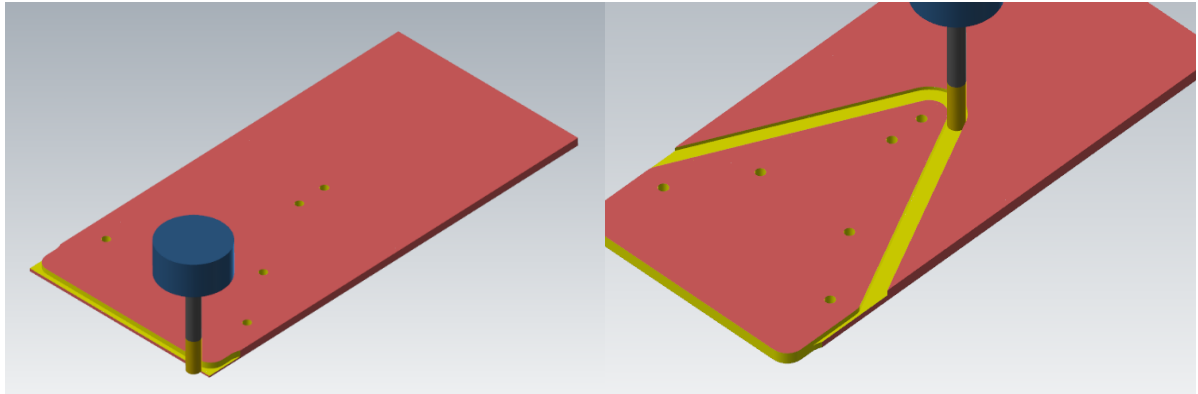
(a) Workpiece rear end milling cycle on the left and (b) workpiece sides and front milling cycle on the right
